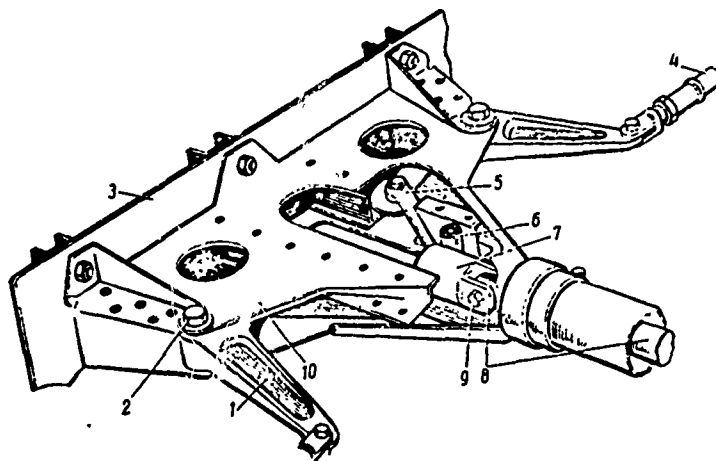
The UZ-1A electrical mechanism for lower wing flap control: 1 - actuating arm; 2 - bolt; 3 - bottom part of frame No. 8; 4 - rod; 5 - guide; 6 - ball bearing of slider; 7 - slider; 8 - rod of electrical mechanism; 9 - bolt; 10 - box of the mechanism.
